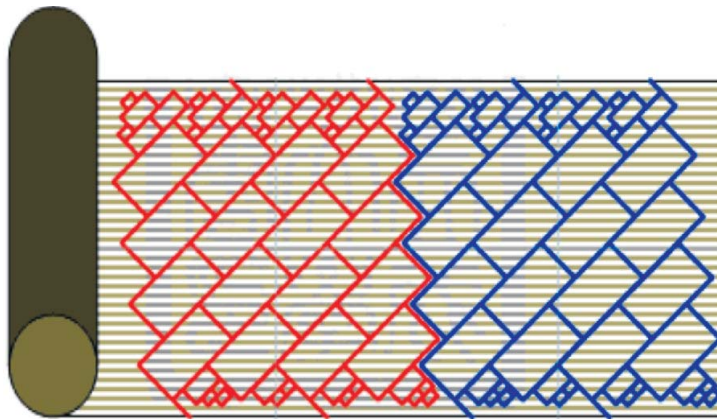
The Diagram of Cutting Angle of Polarizer Knife Mold
